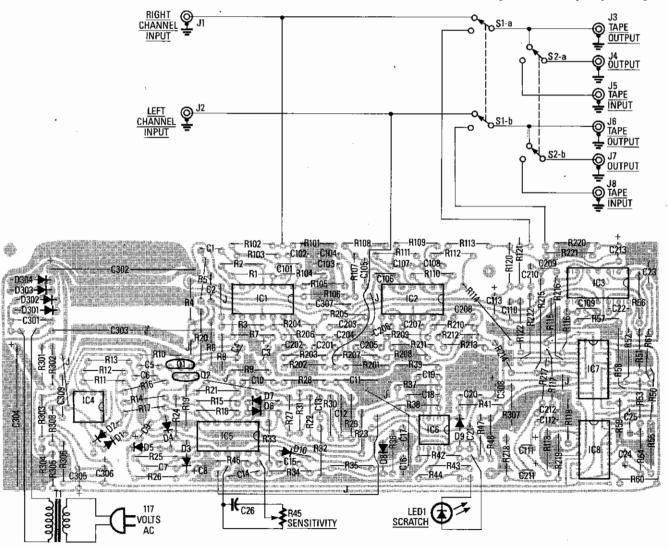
STUFF THE PC BOARD and wire the front-panel components as shown here. Resistors R114, R222, R215, R216 must be bent as shown in Fig. 10.
